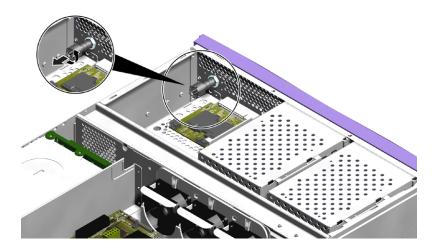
Disconnecting the Keyswitch Wiring Harness
